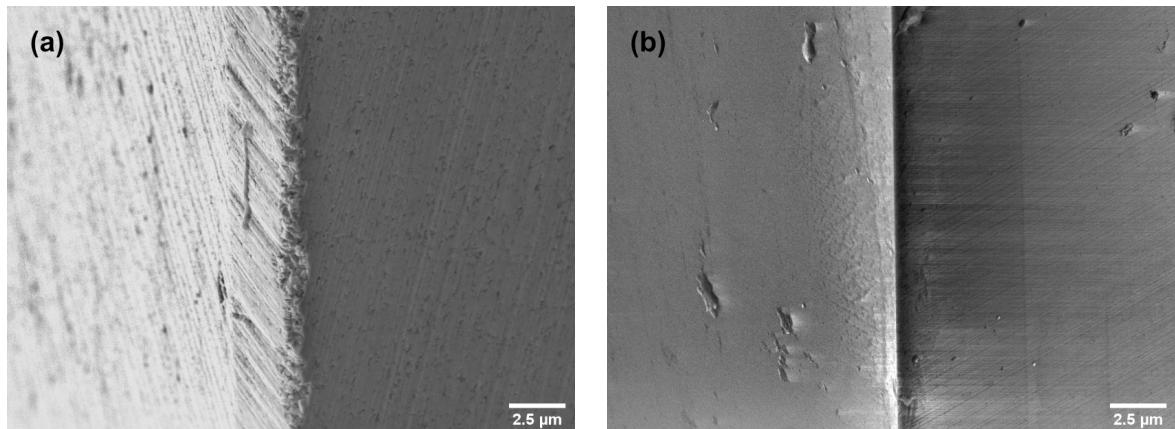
SEM-images on the flank (left hand side) and rake face (right hand side) of the utilized tools. (a) SC-tool, (b) MD-tool.
